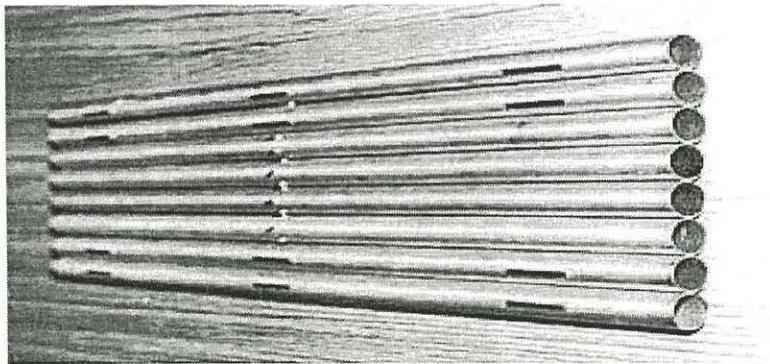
Zr-4 FUEL CLADDING TUBE WITH RESISTANCE WELDED Zr-4 BEARING AND SPACER PADS PRIOR TO FUEL PELLET LOADING AND ENCAPSULATION.
